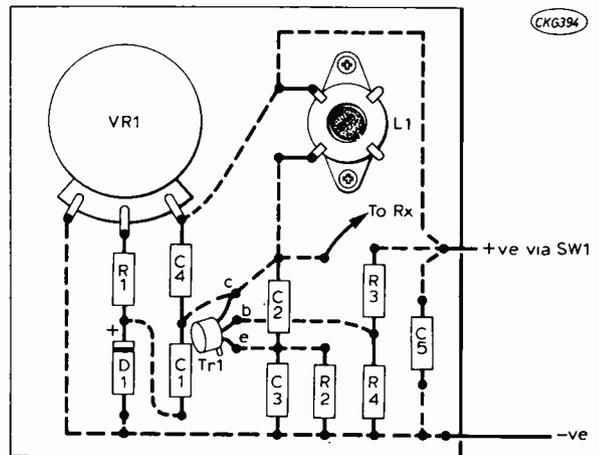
A suggested component layout on drilled s.r.b.p. board.
